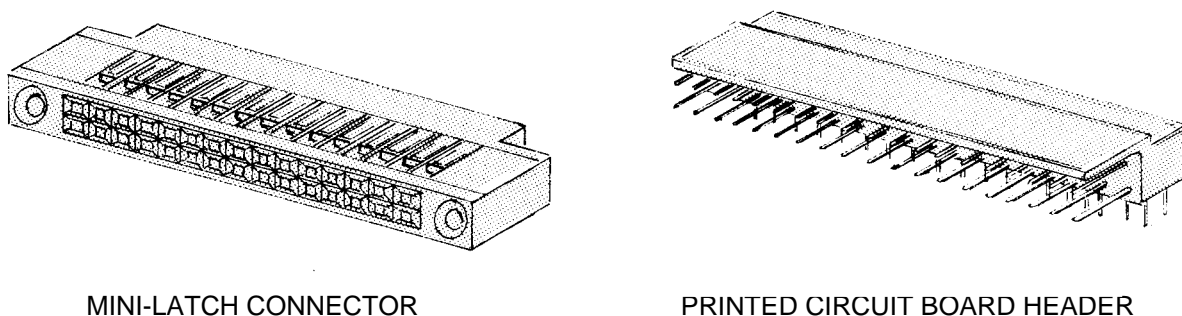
Berg Printed Circuit Boards Connectors and Headers
